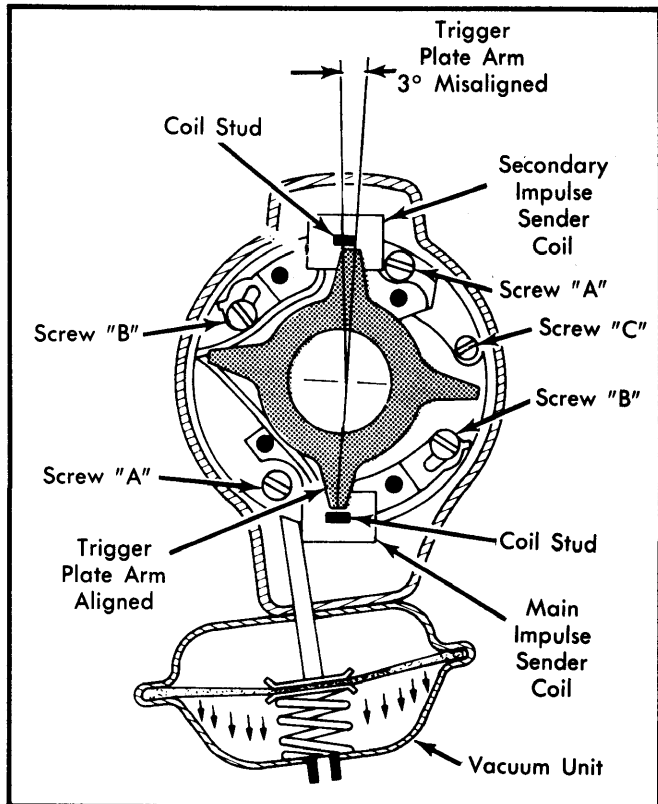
Adjusting Ignition Timing by Misaligning Trigger Plate Arm 3°
